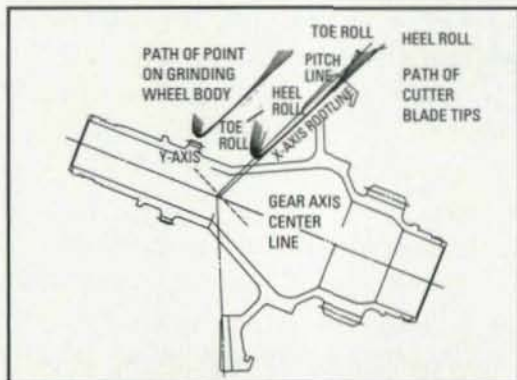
CH-47D forward sun/bevel gear with grinding wheel tip and body point plots.
